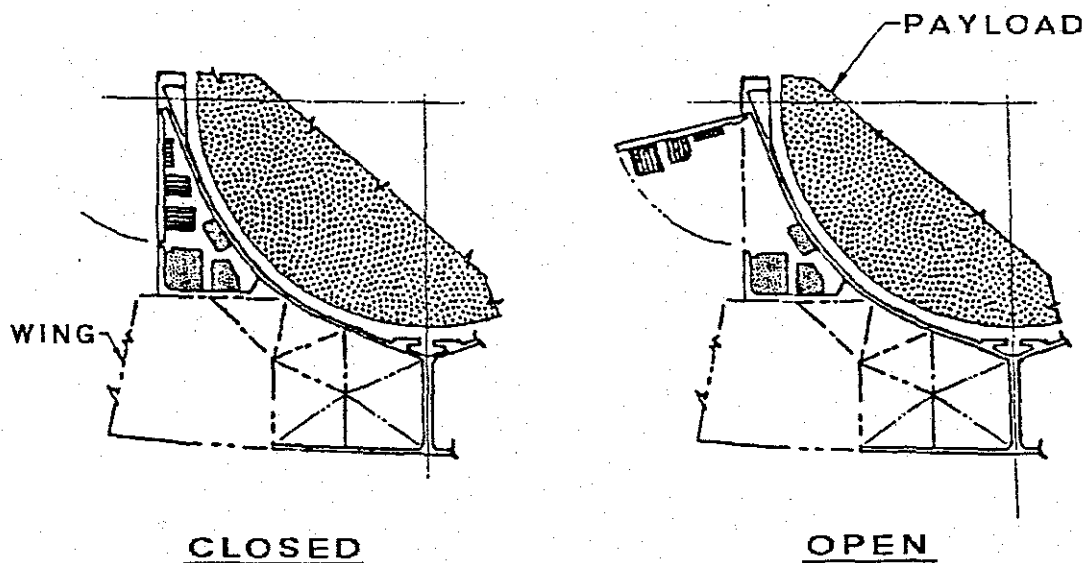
If equipment is mounted on an external access door as shown, the door and its equipment become a replaceable module. Because the equipment swings away, making equipment behind it also accessible, packing density can be increased.
